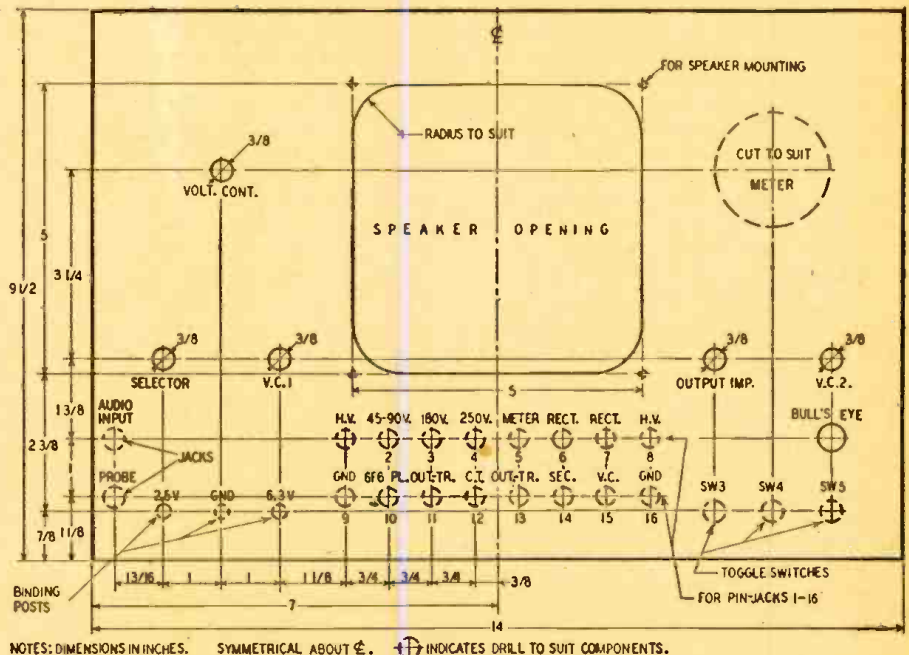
The complete drilling plan of the panel may be modified to suit the constructor's parts.
